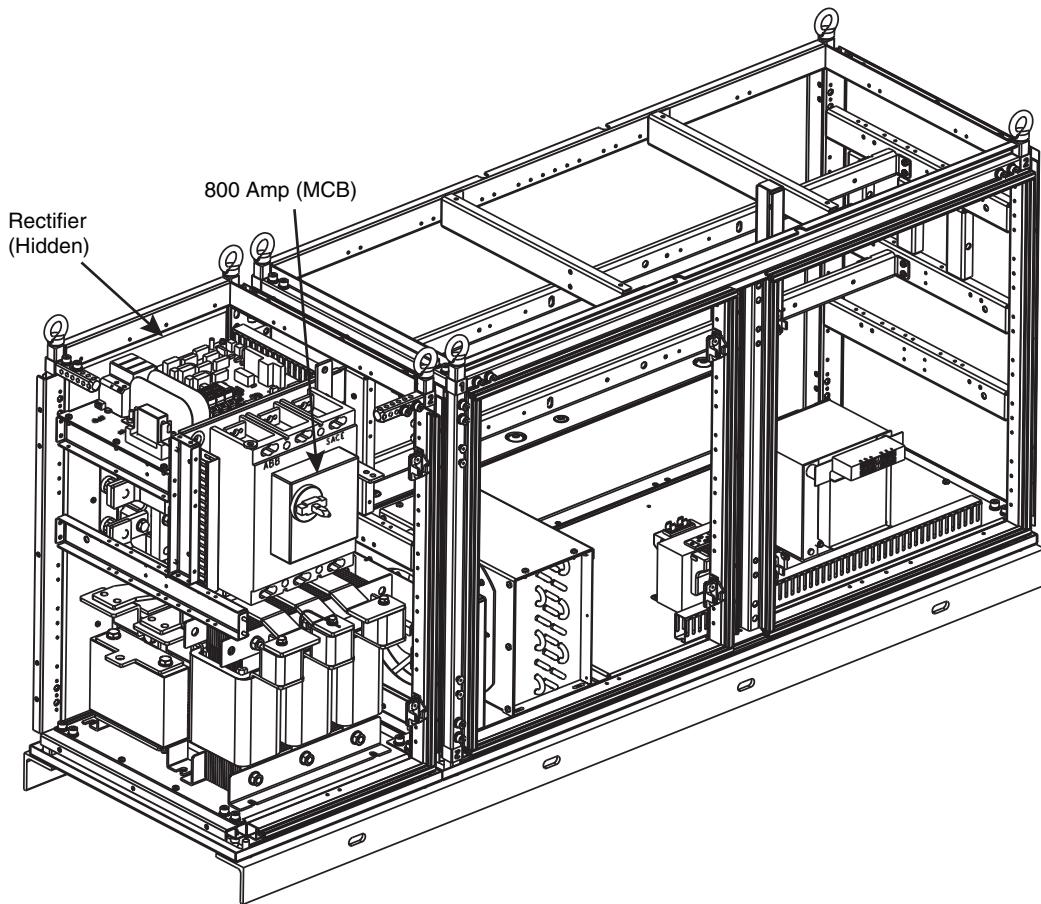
680 Amp VFD Assembly Detail Showing Rectifier and Main Circuit Breaker (MCB) Locations
